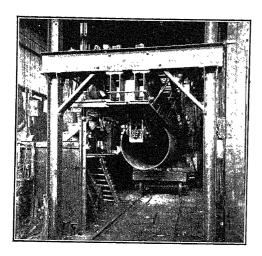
End View of 36-Ft. Pipe Welding Machine Showing 30-Ft. Section of 48-In. Pipe Ready for Automatic Arc Welding of Longitudinal Seam
